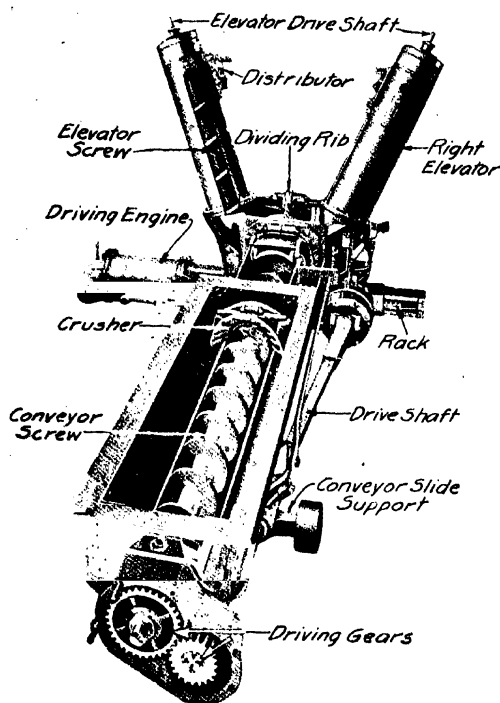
Rear View of Locomotive Duplex Stoker.
